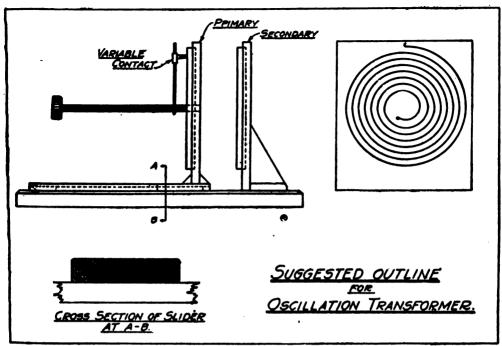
Suggested Design for Pancake Oscillation Transformer.
